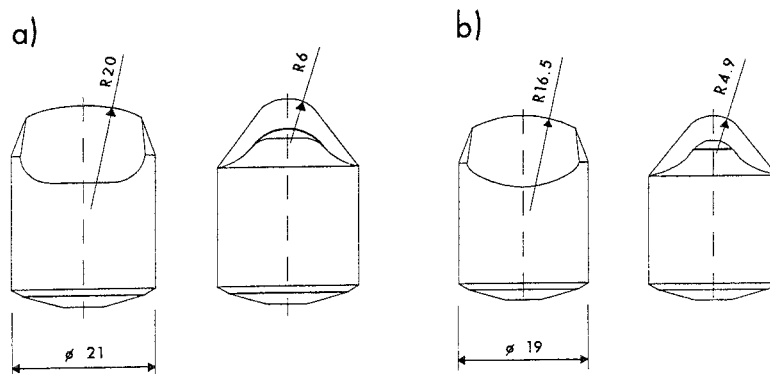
The shape of the buttons in cutters of type a) CMR-41 & -52, b) CMR-55 & -66.
